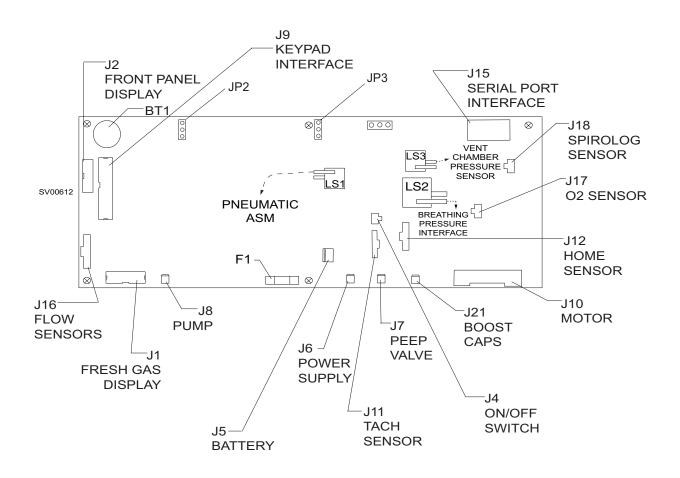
Main Controller PCB Connector Locations (P/N 4118079)
